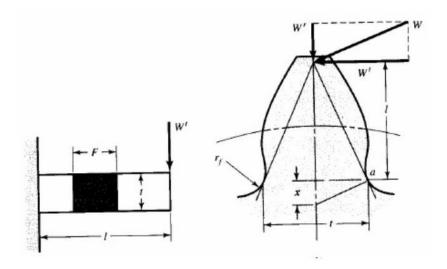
Bending Stress on a Single Teeth of Gear
